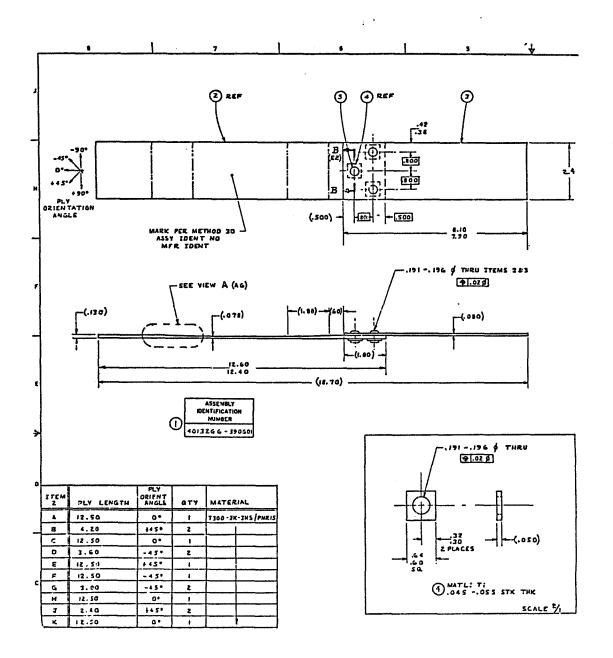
Initial Riveted Titanium-End Flange Subcomponent Specimen.
